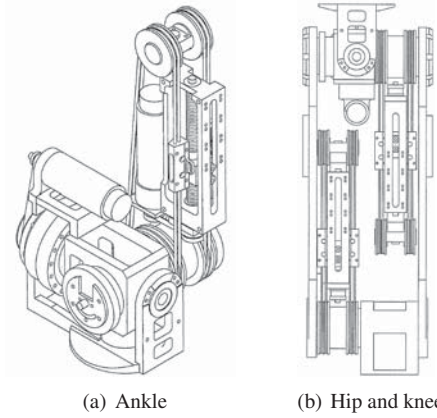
Assembly drawings of joints. (a) is top-left view of left ankle and (b) is frontal view of left thigh.
